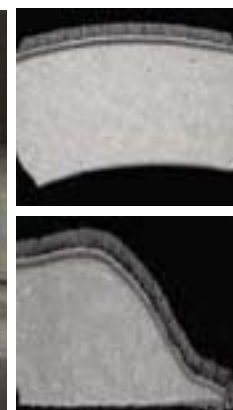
Cross sectional coating morphology indicating fairly uniform coating thickness
